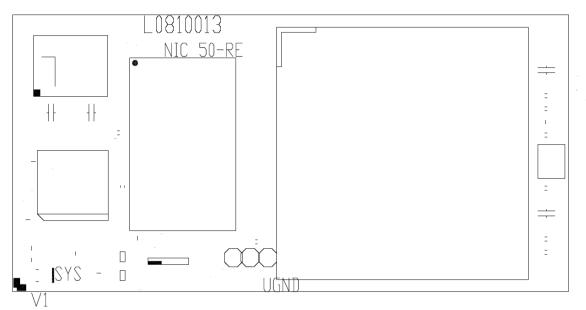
Device Drawing NIC 50-RE/NHS without Heat Sink
